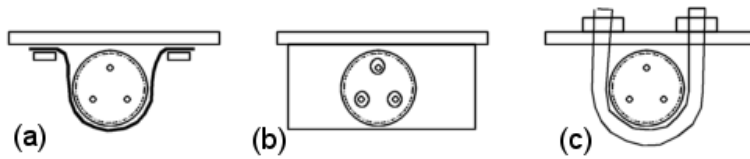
Three different ways to mount the motors with gearboxes. (a) to use a 1 cm wide band with holes in and fasten with screws. (b) to have a plate in front of the gearbox and use three screws to mount the gearbox. (c) to bend a pole around the motor and gearbox and fasten it with nuts from the upside.
